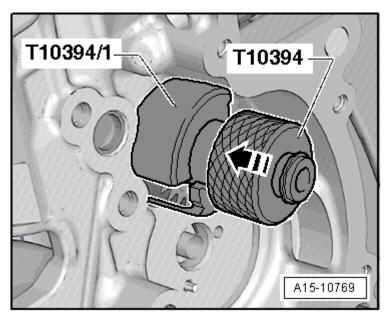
Identifying Installation Of Puller Pieces -T10394- And -T10394/1-
